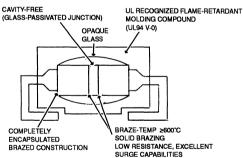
SURFACE MOUNT SUPERECTIFIER PACKAGE
